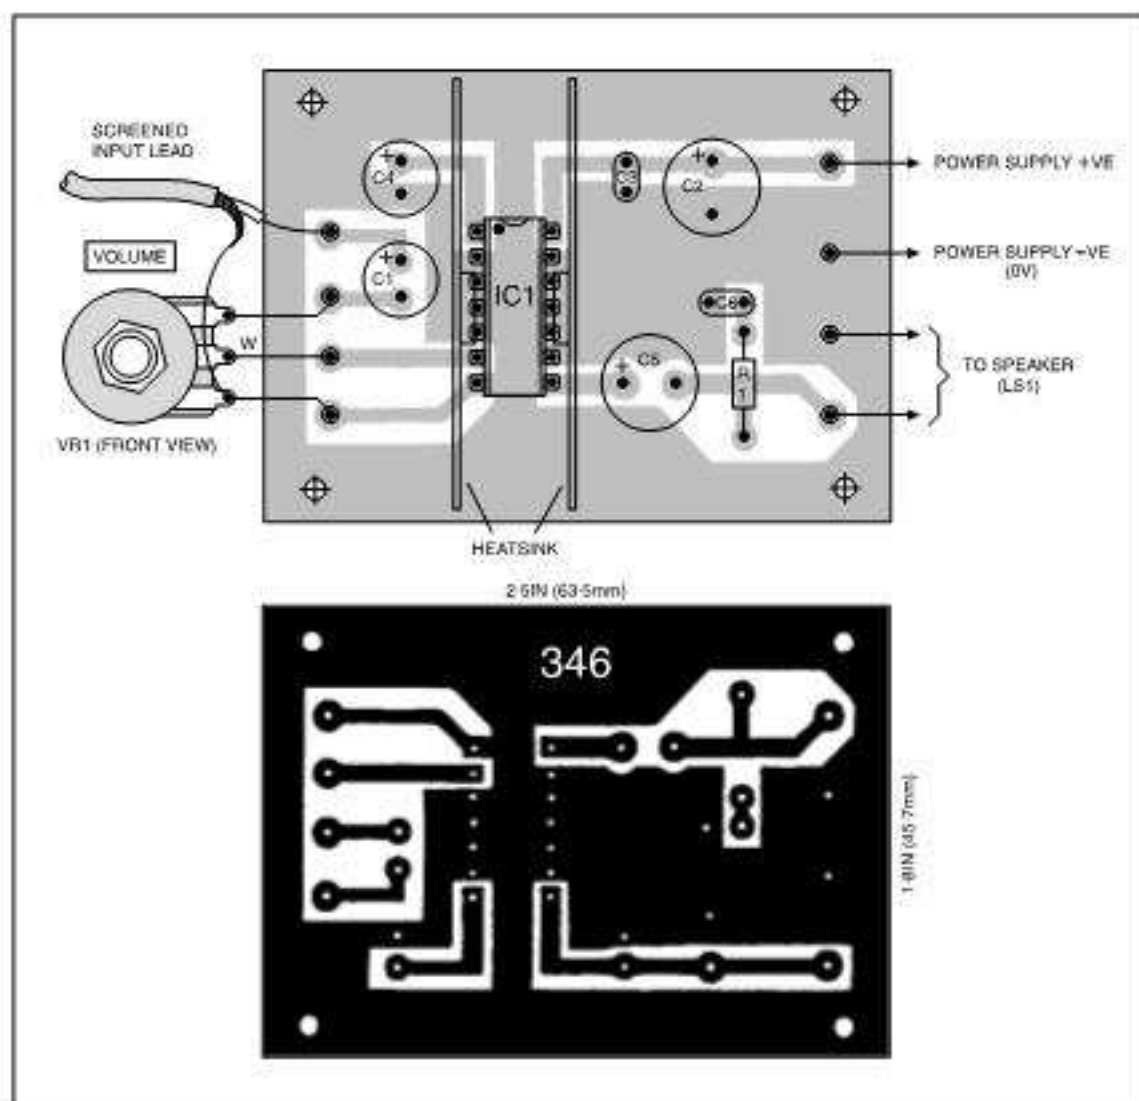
The LM380N printed circuit board component layout, off-board interwiring and full-size copper foil master pattern. Note the heatsinks.
